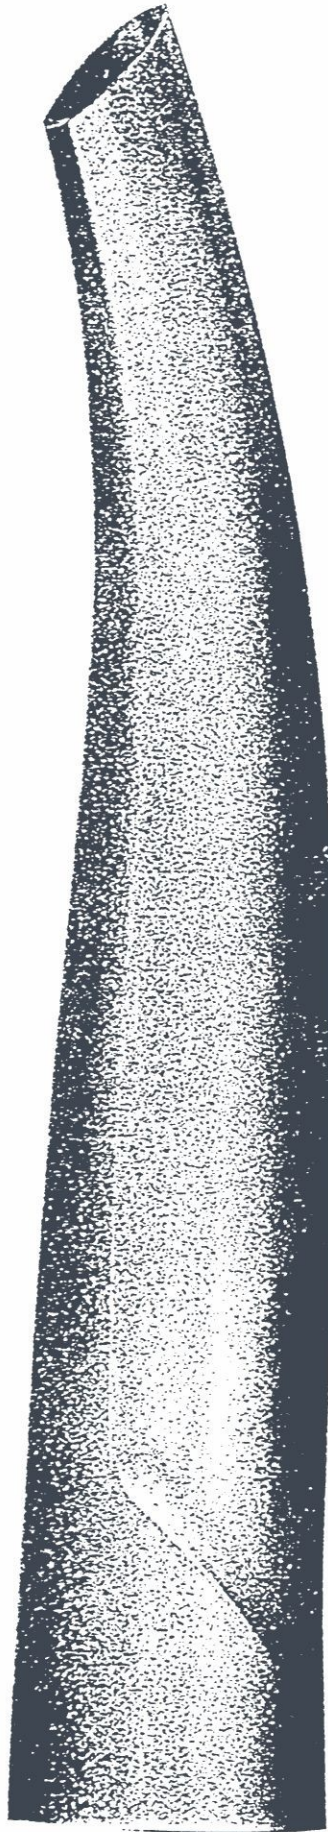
Ti-3Al-2.5V tooth drill structure, superplasticity formed
